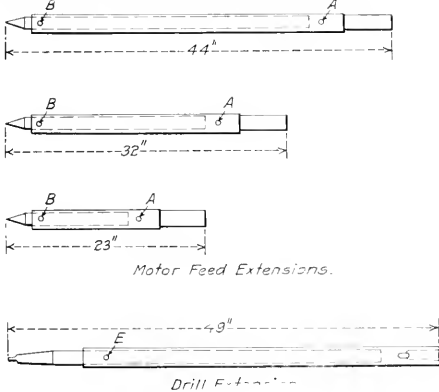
Sizes Used for a Set of Drill Motor Extensions
